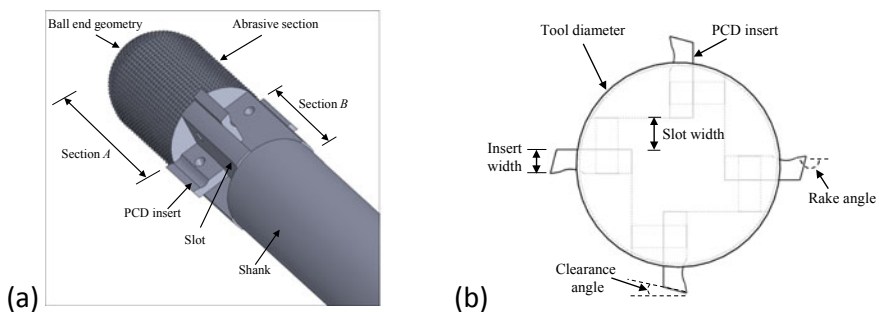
a 3D model of hybrid tool b tool cross-section [43]
